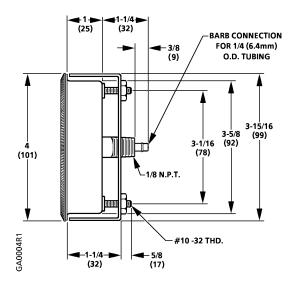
Dimensions of the 3-1/2 Inch Gauge.
